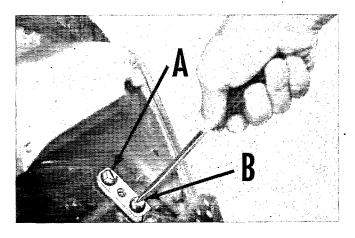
Adjusting the bed knife is the most important adjustment on your Sportlawn mower. To set the bed knife up against the reel blades, loosen rear adjusting screw "B" (using a screw driver as shown) very slightly about 1/20th of a turn, then tightenfront screw "A" in the same manner. Do this at each end of bed knife. Then slowly revolve reel to see if it is adjusted properly. Repeat or reverse above operation until bed knife bears lightly and smoothly against each blade and can cut paper for its full length.
